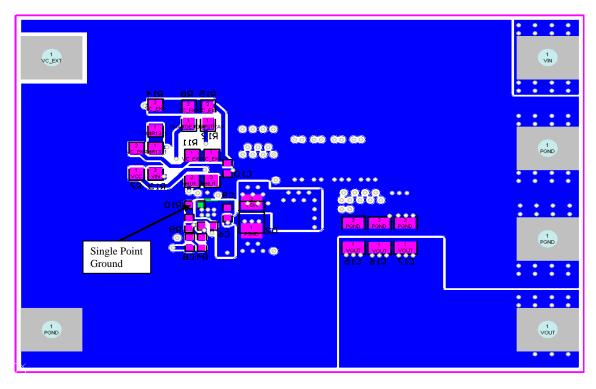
IRPP3624-12A Reference Design bottom layer layout.
